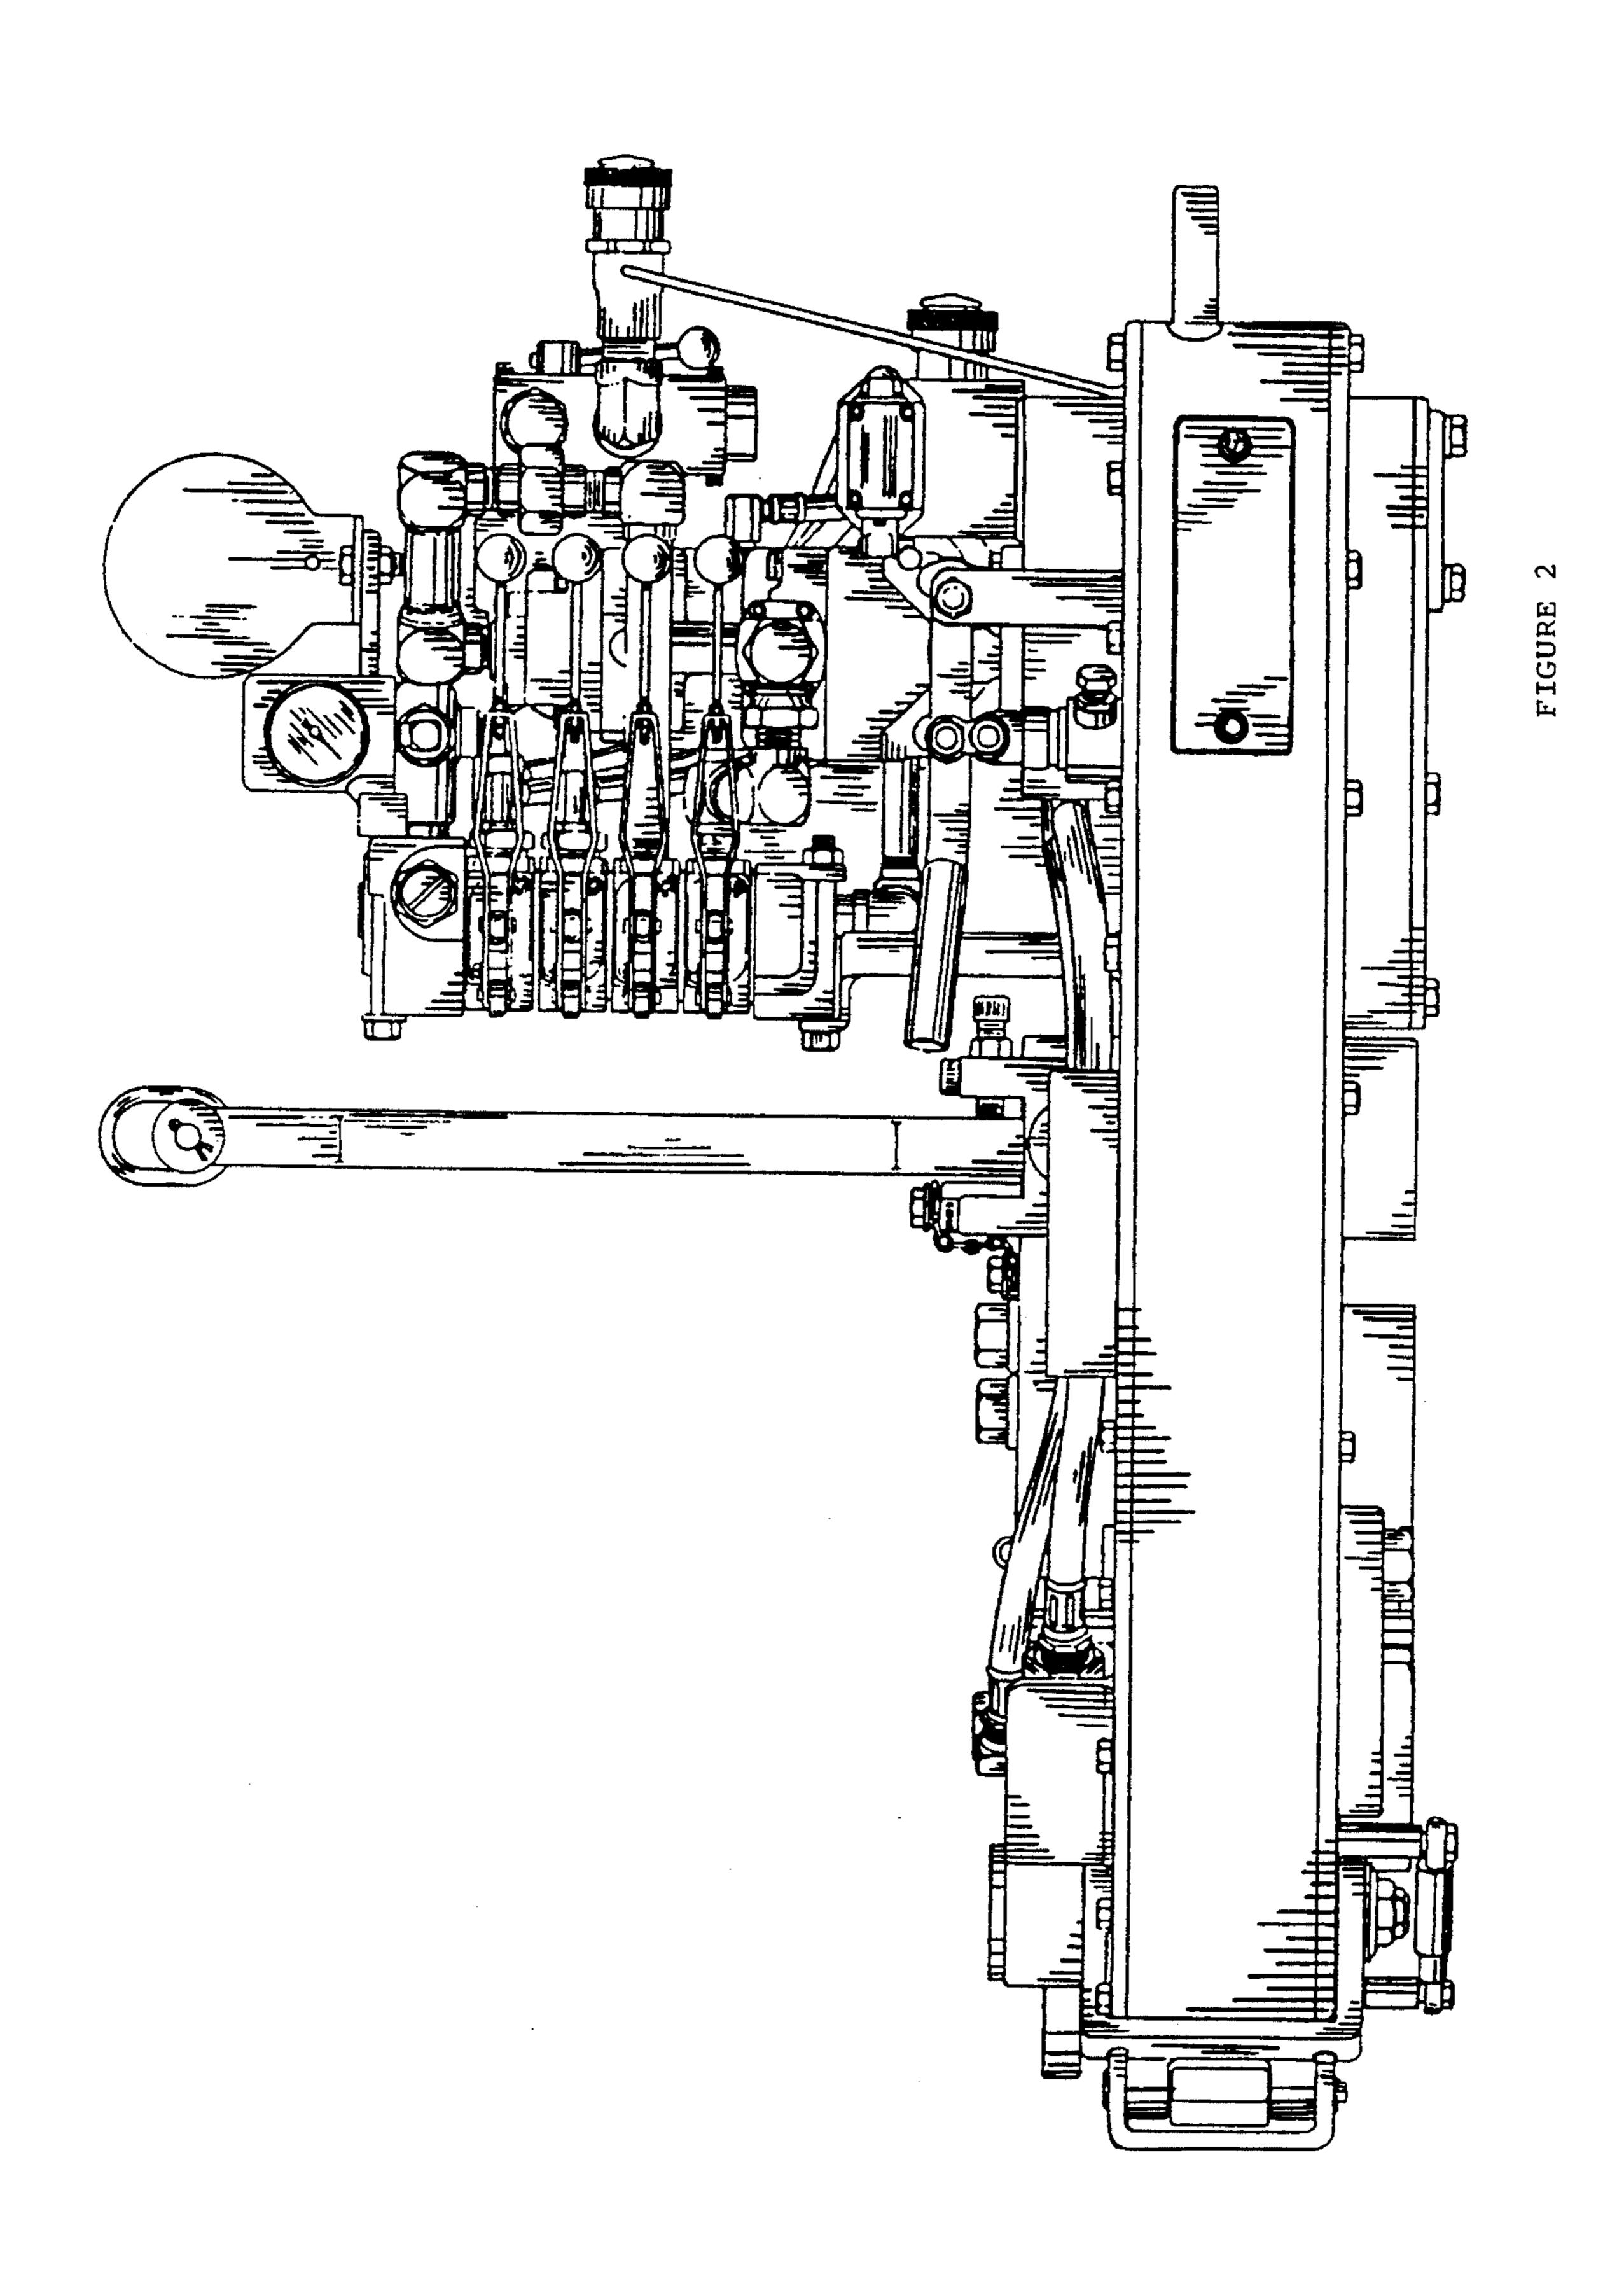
is a rear end elevation view of the power tong shown in FIG. 1; and.
